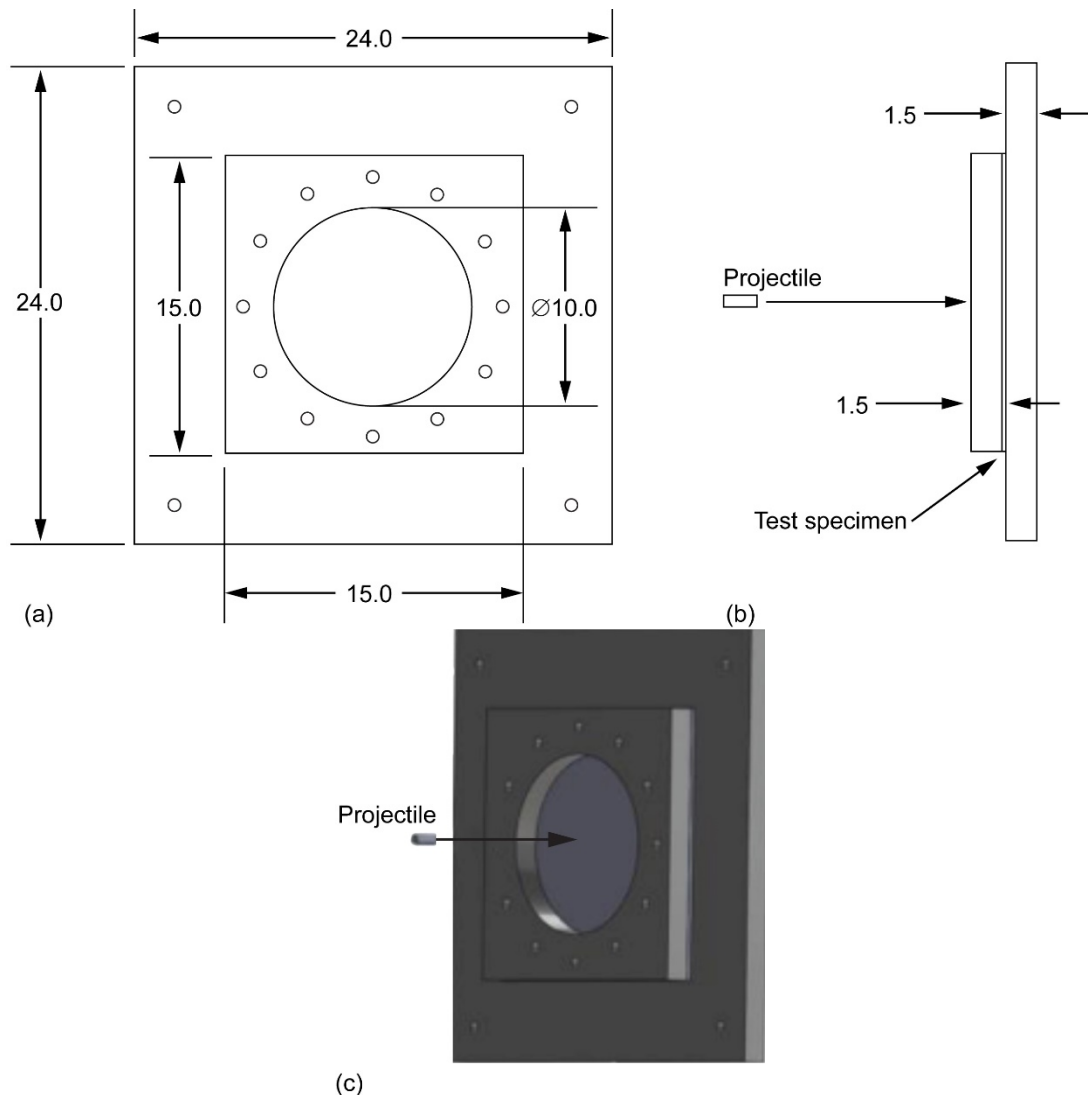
Test fixture assembly. Dimensions in inches. (a) Front view. (b) Side view. (c) Clamp fixture assembly.
